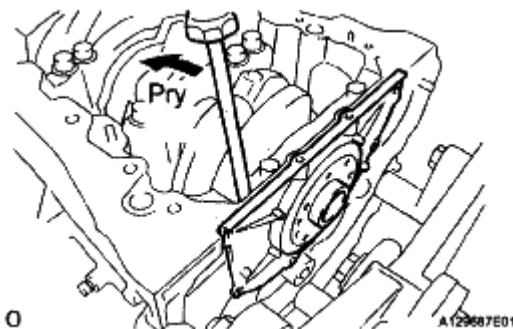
Prying Out Oil Seal Retainer Using Screwdriver
